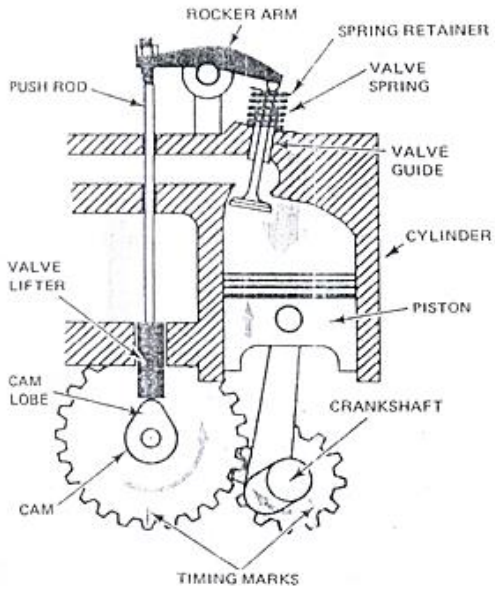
Valve train on an engine using a pair of gears to drive the camshaft. The cam lobe has pushed the push rod up so the valve is opened.
